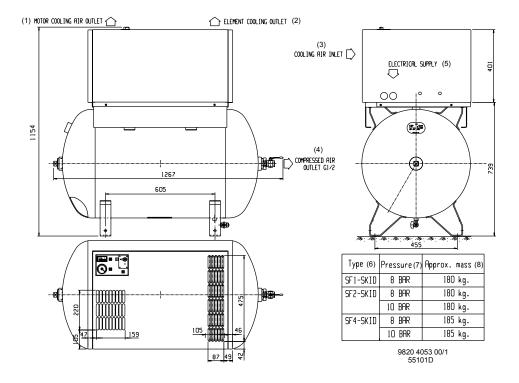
Dimension drawing, SF 1-4 Tank-mounted
